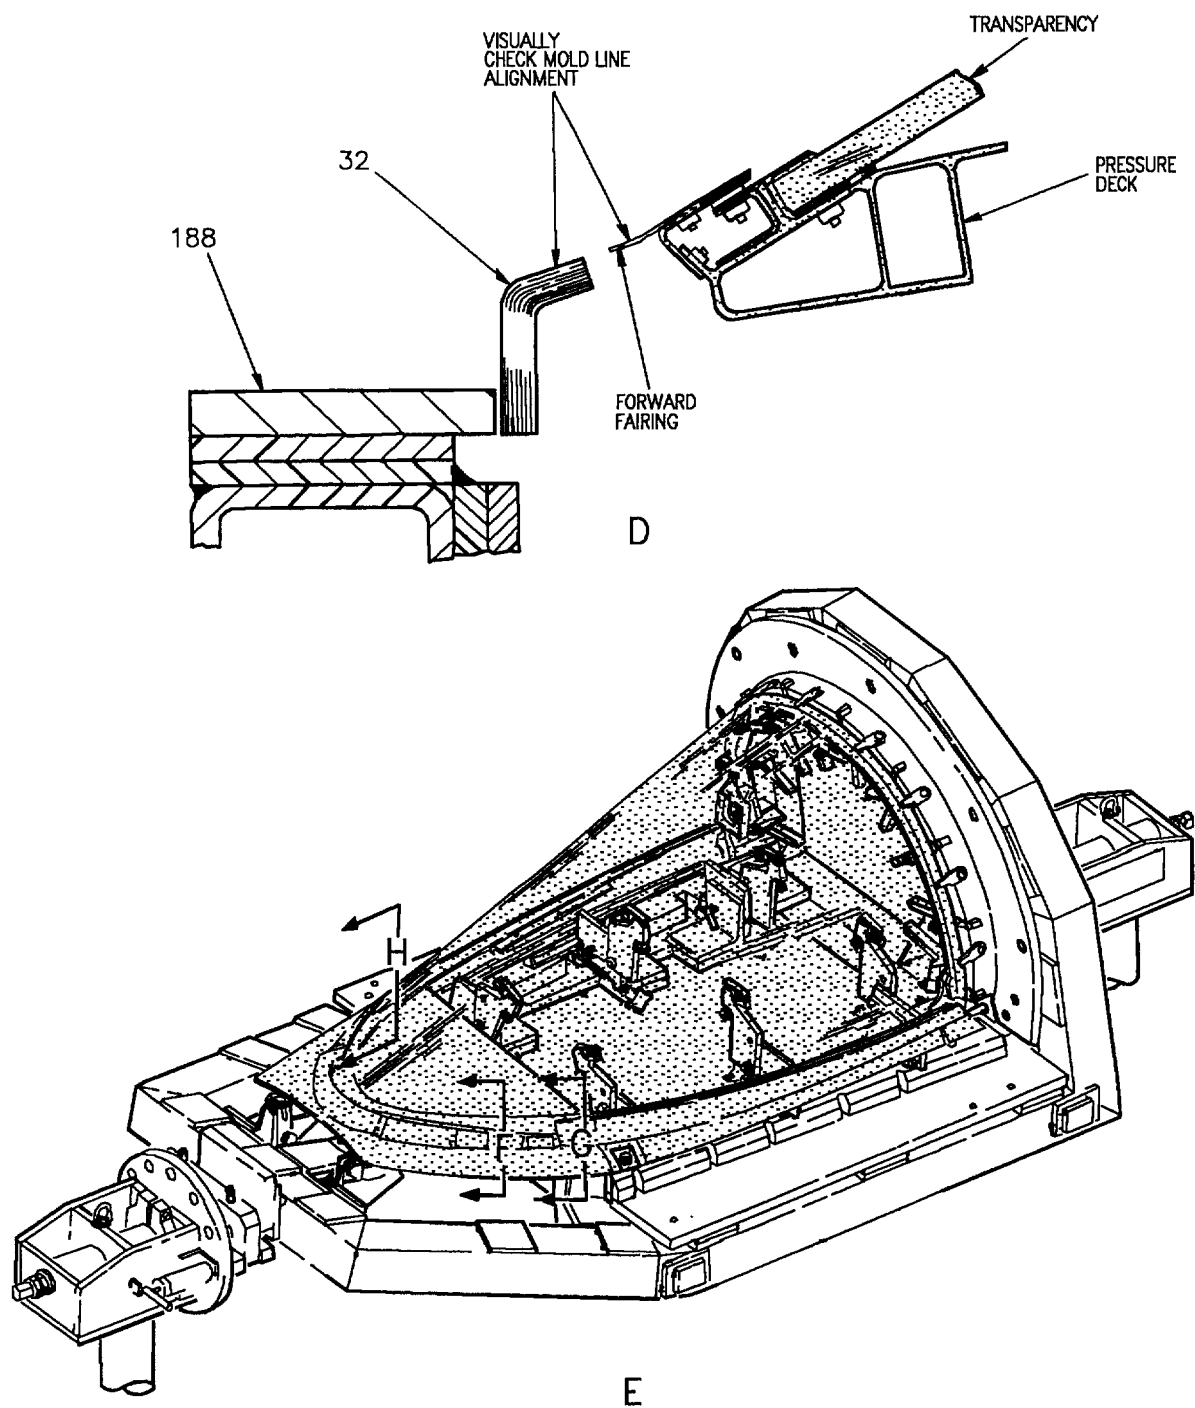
Inspection or Replacement - Forward Fairing (Sheet 3)
